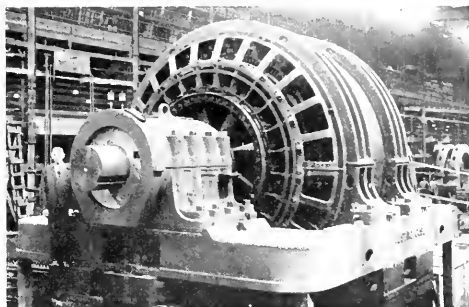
15 000 HP DOUBLE-UNIT REVERSING MOTOR
